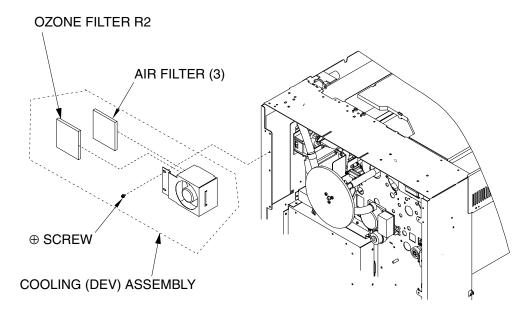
Removal of the Air Filter (3) and Ozone Filter R2
